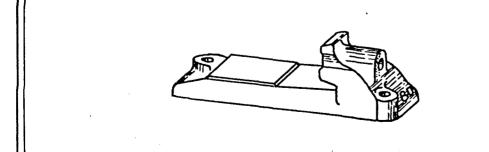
TYPICAL 60,80&100 B. COMMON HEEL CHAIR X&Y LAYOUT
